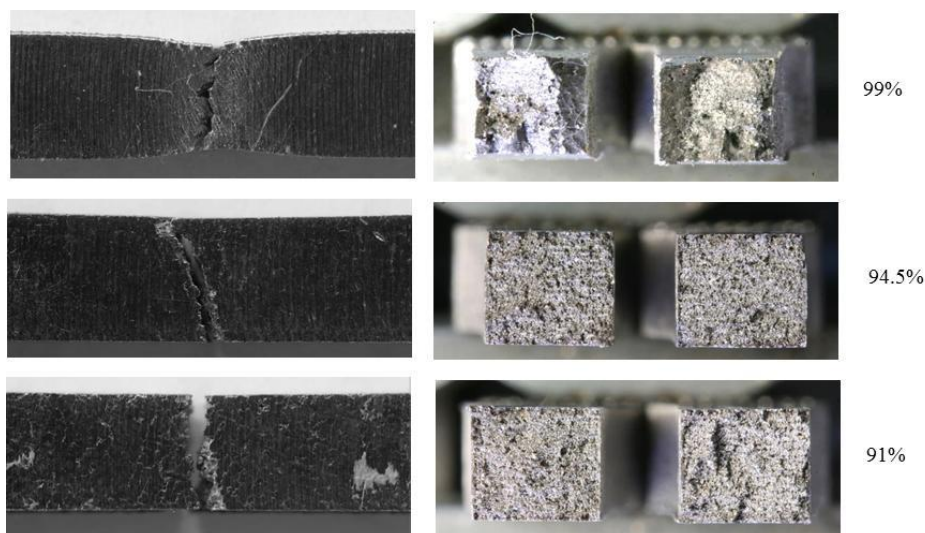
Fractured samples (left) and fracture surfaces (right).
